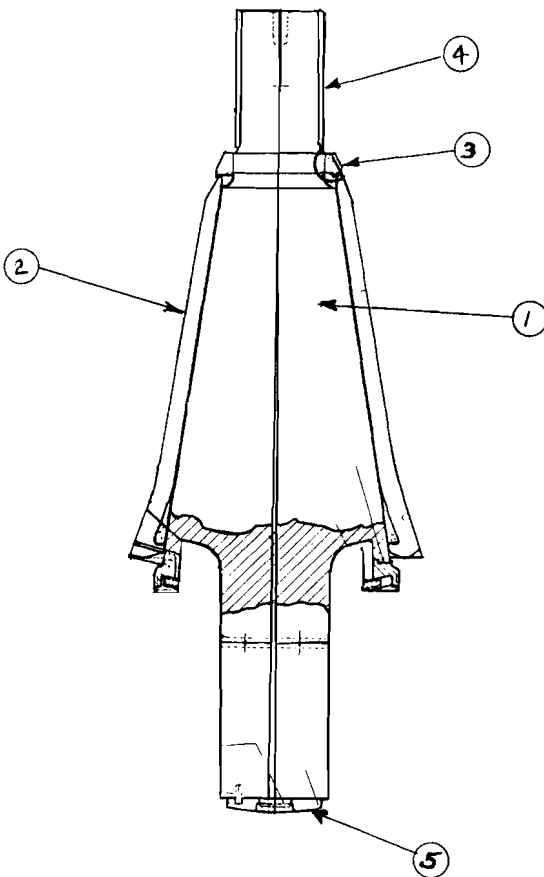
Main shaft assembly (courtesy of Allis-Chalmers). Legend: (1) integral main shaft, (2) mantle, (3) head nut, (4) main shaft sleeve, (5) main shaft step.
